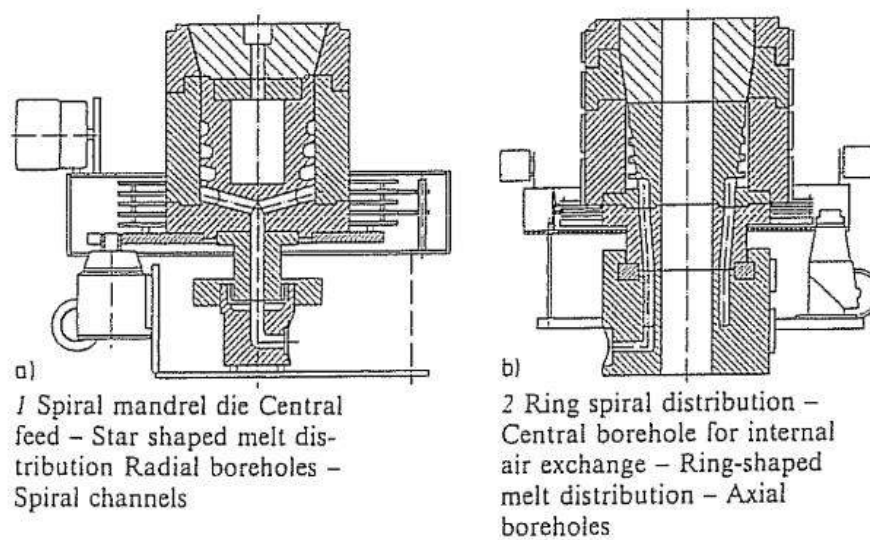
Spiral mandrel dies for blown film extrusion (Reifenhäuser)
